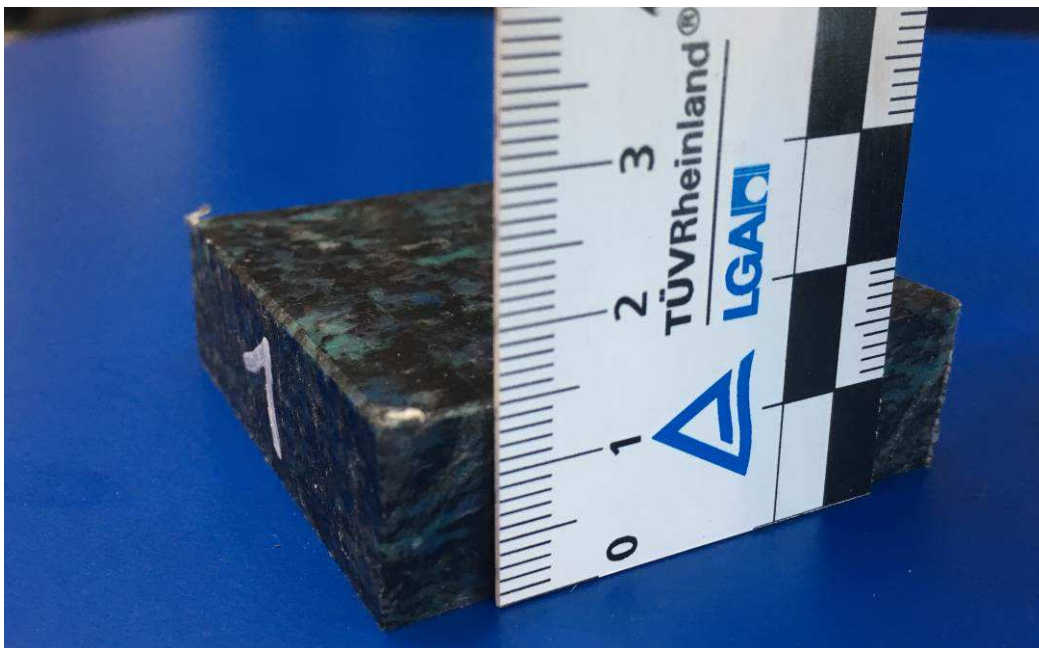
Plate Type 2: Dimensions: 50 mm x 50 mm x 15 mm, test specimen 1
